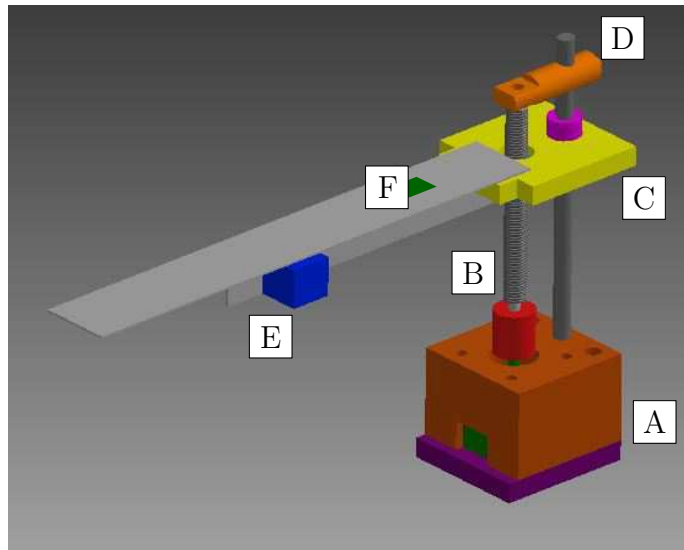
New design of the cantilever module. A stepper motor is anchored by a removable aluminum casing (A). The stepper motor turns the leadscrew (B), which causes the "climber" (C) to move up or down. The leadscrew is connected to a linear guide by a cap (D) which ensures their colinearity and locks the leadscrew in place. The cantilever is attached to the climber, and oscillations can be induced by an induction coil (E) and a magnet attached to the cantilever. A tensometric array (F) is attached to the cantilever to measure its vertical flexion.
